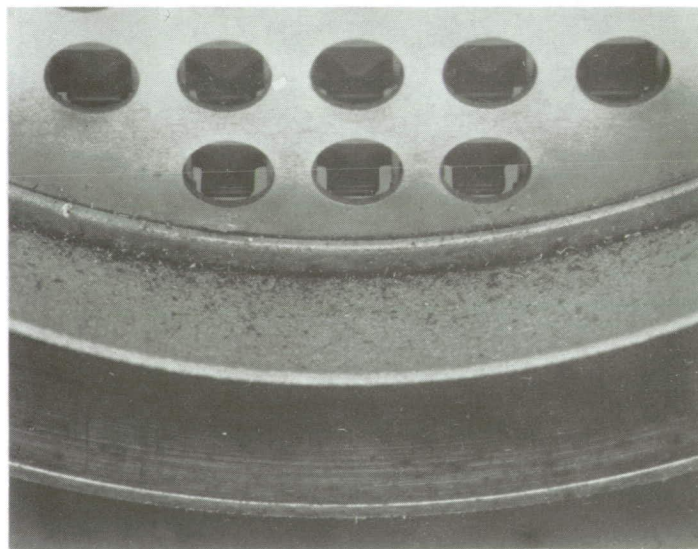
Interior surfaces of anode pole-piece insert and screen grid on disassembly of thruster after test, showing loose flakes.
